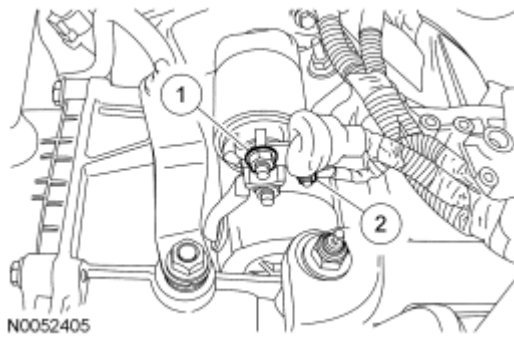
Identifying Starter Motor Wire Terminals & Nuts
